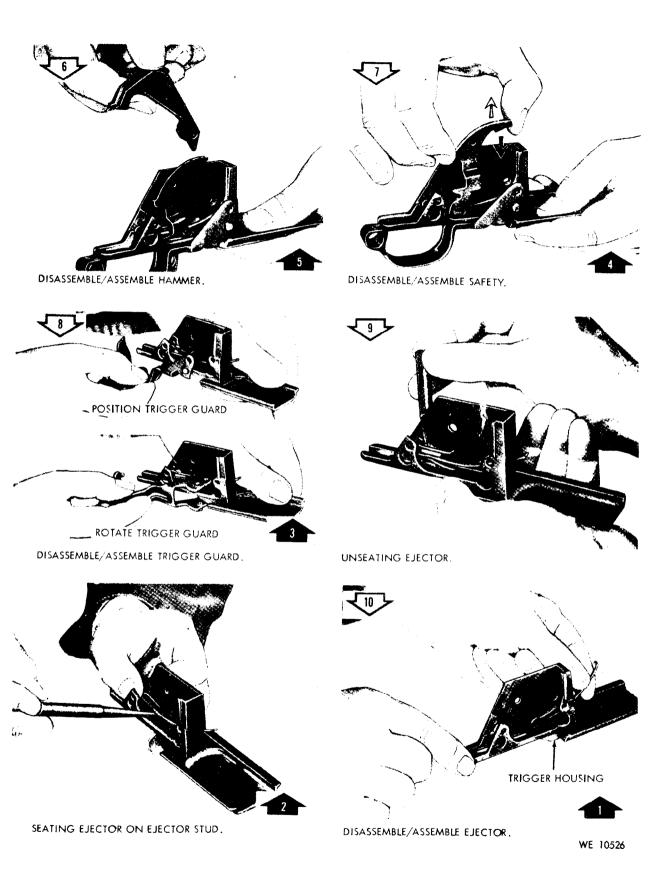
Disassembly/assembly of trigger housing assembly. (2 of 2)
